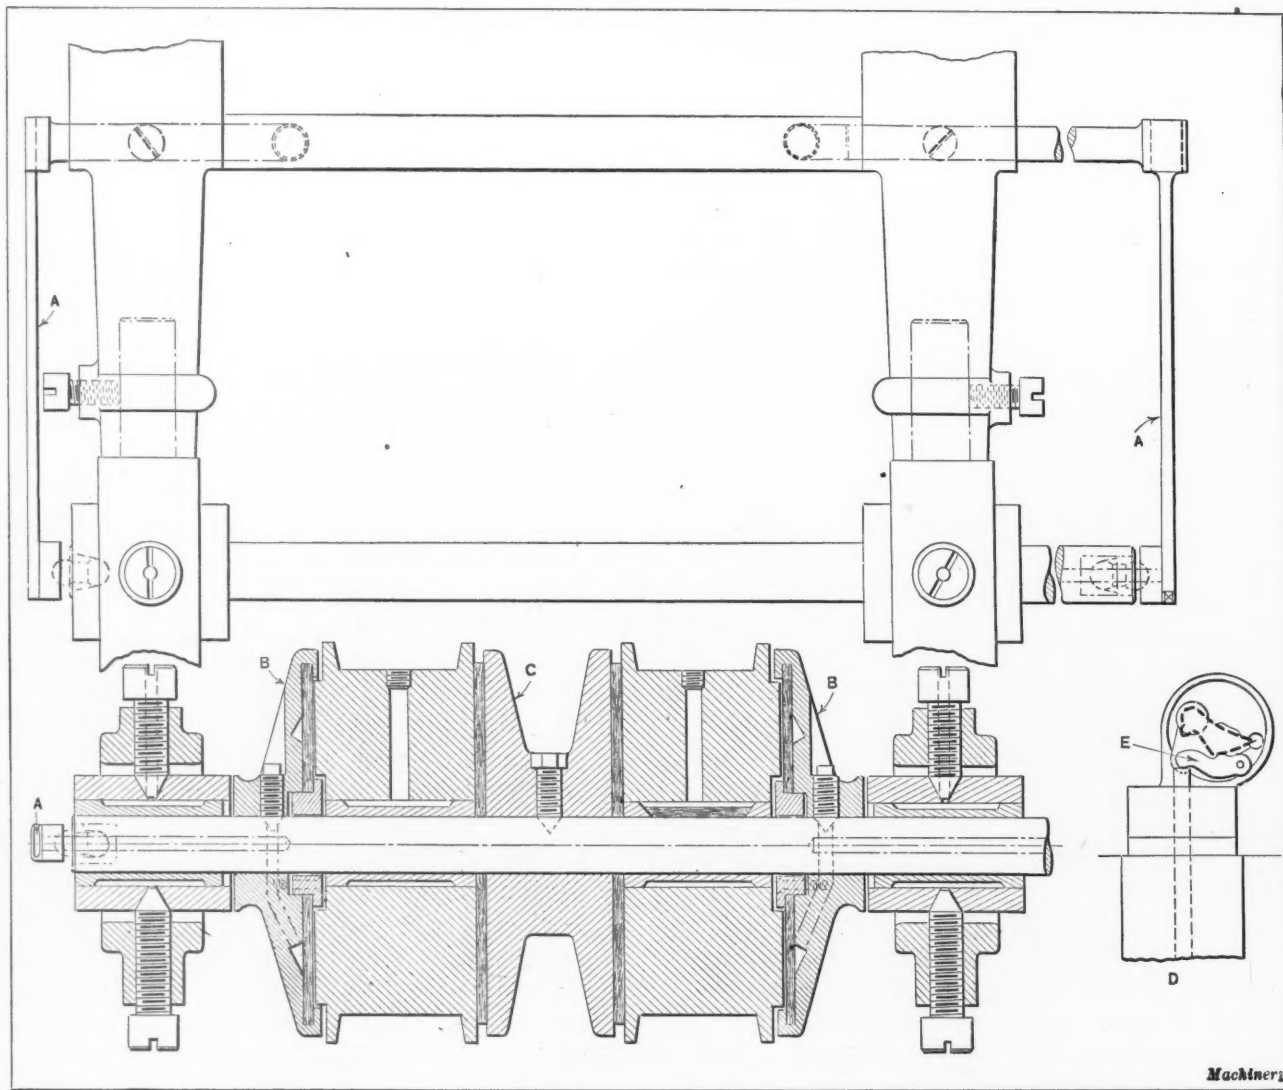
Assembly of an Air Countershaft; also, at D, Partial View of an Air Chuck for Balance Cocks
